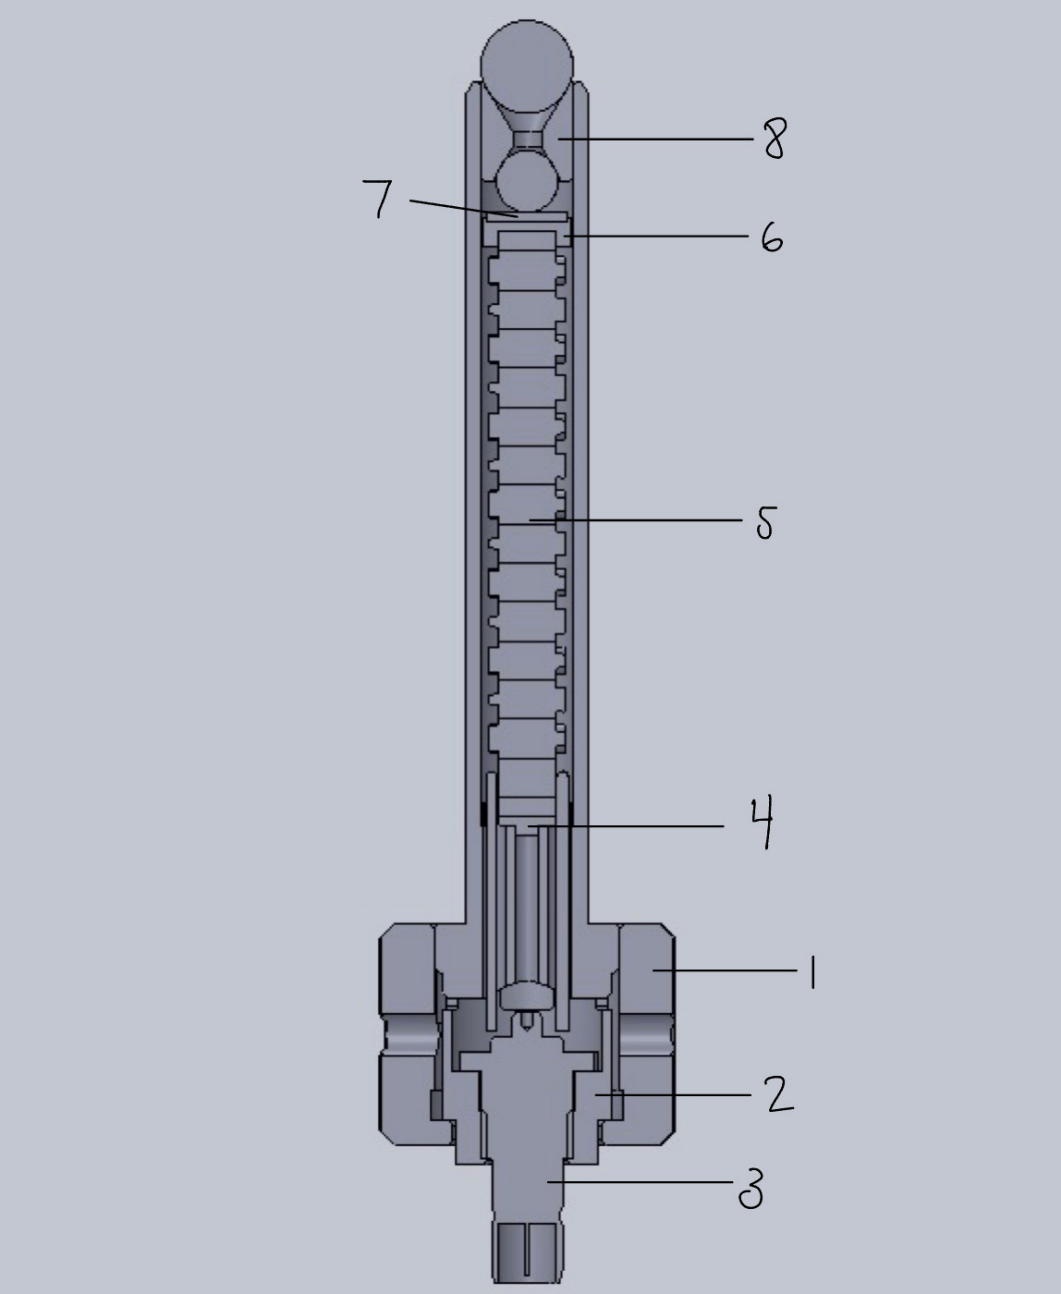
The interior view of the custom piezo screw. At the bottom, we have 1,2, and 3. These comprise the thumbscrew assembly. 4 and 6 are alignment tools used to align the piezo inside the screw bore. 5 is the Noliac piezo. 7 is a sapphire plate which ensures a hard surface of contact between the ball joint and the piezo. 8 is the carriage assembly. The carriage is lubricated so it can move up and down inside the bore, maintaining contact between the piezo and the mirror mount.
